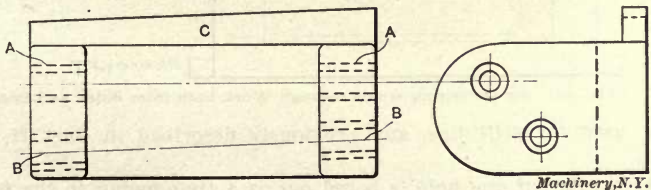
Boring Jig for Boring Holes Placed at an Angle to Each Other
